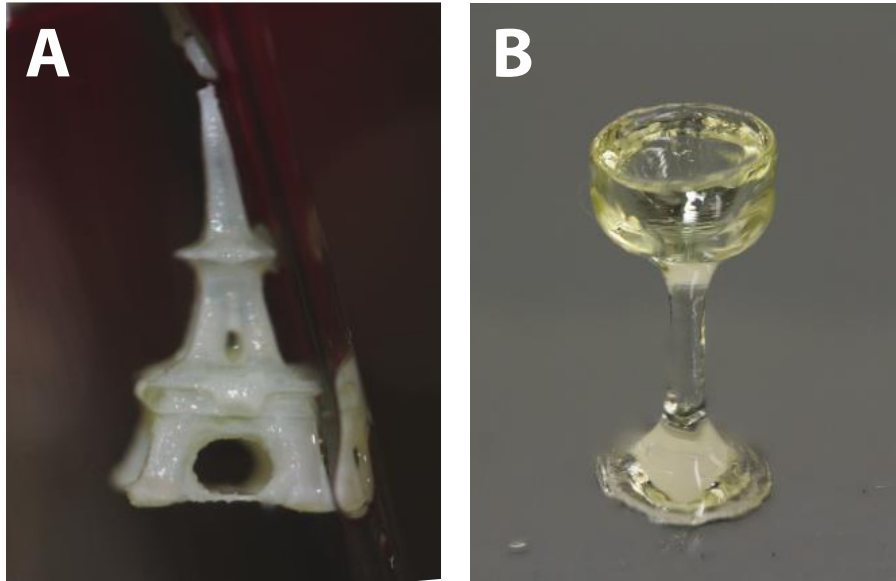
Additional parts printed by CAL. (A) An Eiffel Tower geometry and (B) a wine glass.
